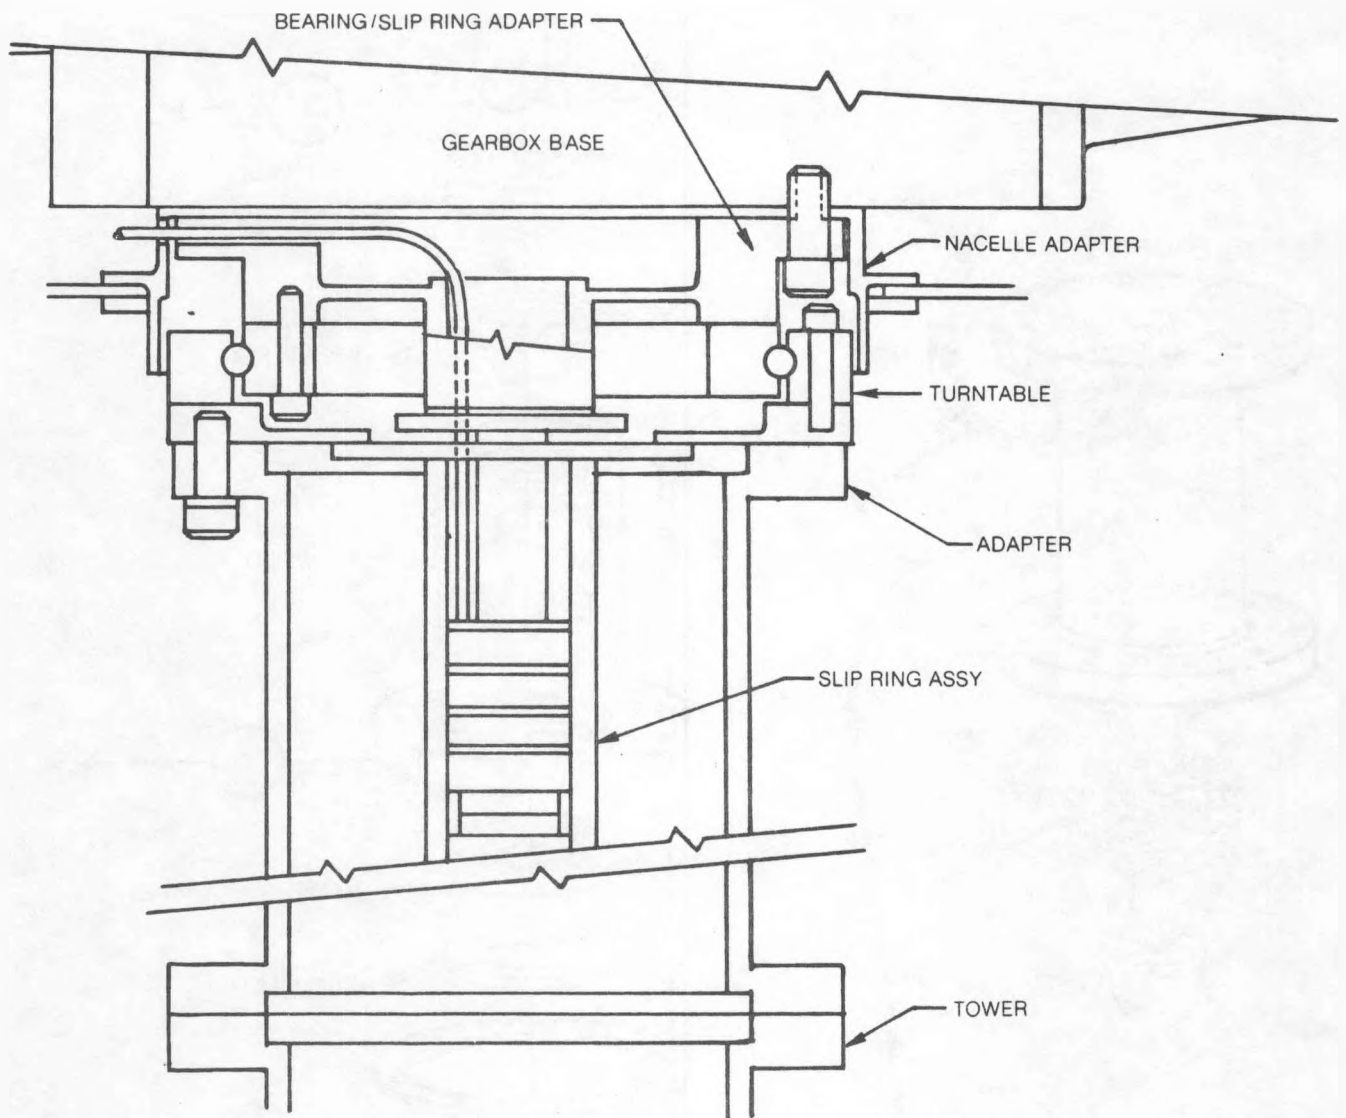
Section Through Tower/Gearbox Interface Showing Alternate Bearing Installation
